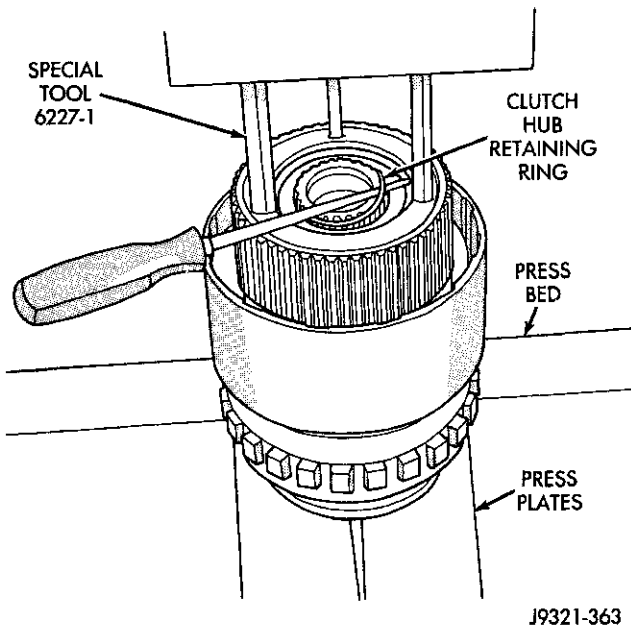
Direct Clutch Hub Retaining Ring Removal
